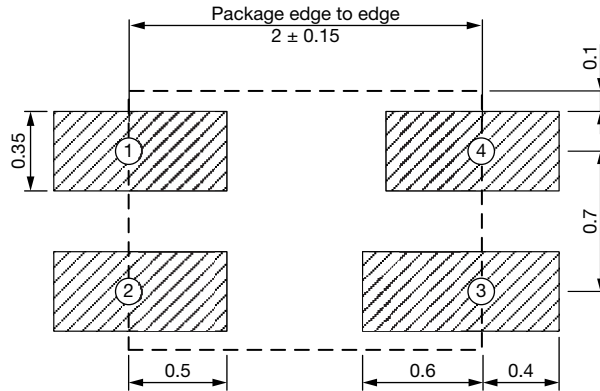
VEML3328A3OG PCB Layout Footprint
